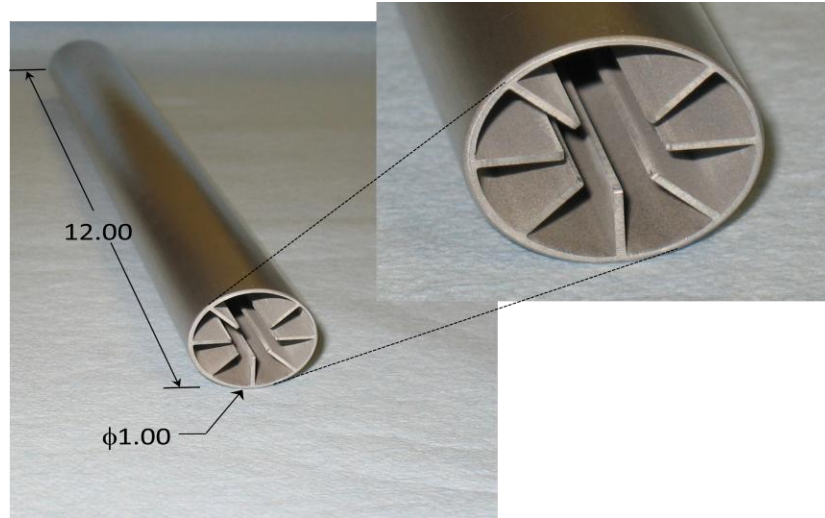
Full Layout and Zoomed in Cross-Section of the SRHX Test Apparatus
